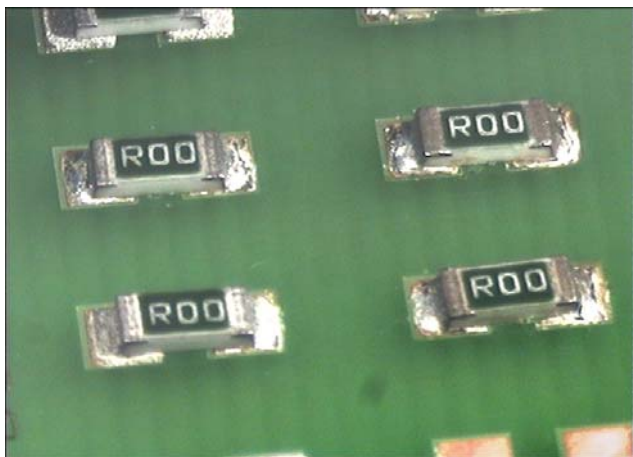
Examples for soldered components, processed in a microwave soldering oven with SnAgCu solder on a FR4 printed circuit board
